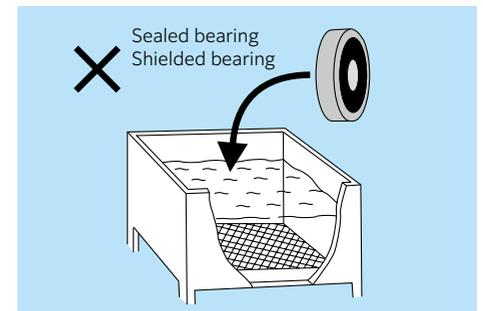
Heating grease filled bearings in oil bath prohibited
